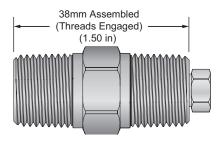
FLS Fluid Seal Fitting and OS Spring-Loaded Oil Seal
